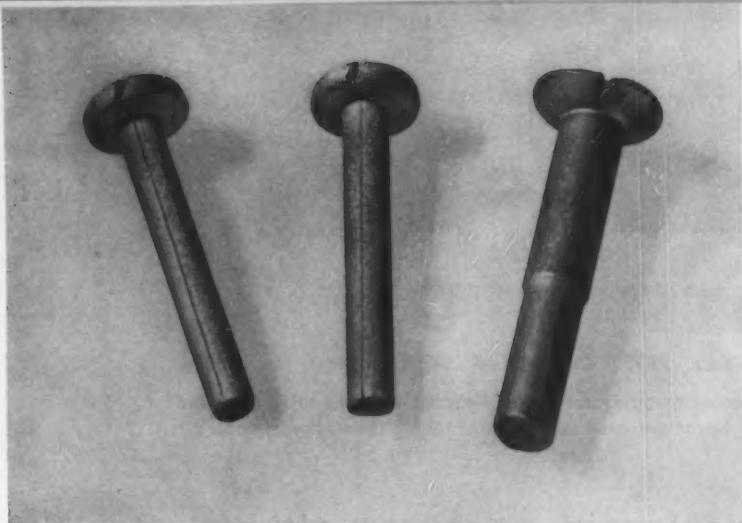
Split heads caused by seams. Copper plating has to be removed to show how seams on the shanks align radially with the splits on the heads.
